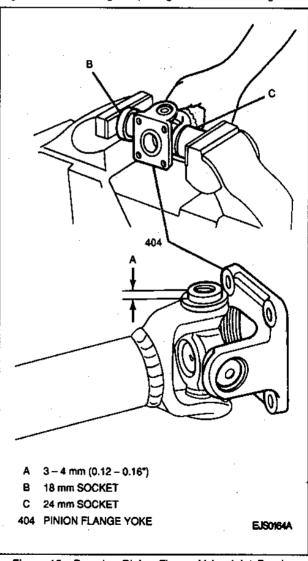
Pressing Pinion Flange Yoke Joint Bearing Caps
